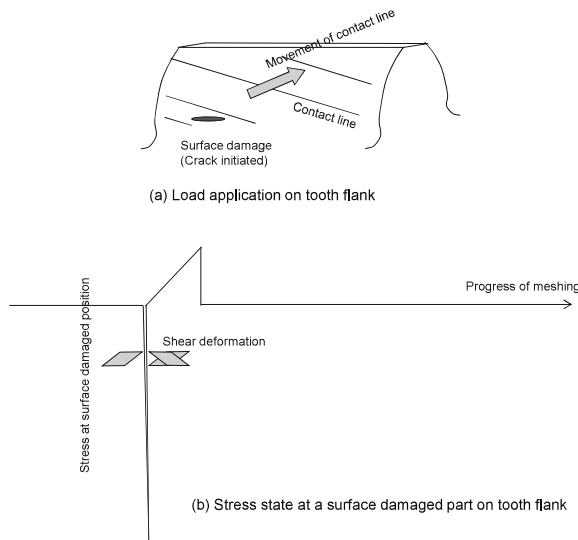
Loading and stress state at the micro-cracked part of tooth flank
